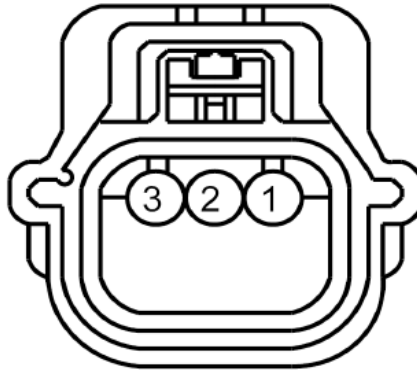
Right Front Seat Cushion Heater Mat Connector End View (C3320)
